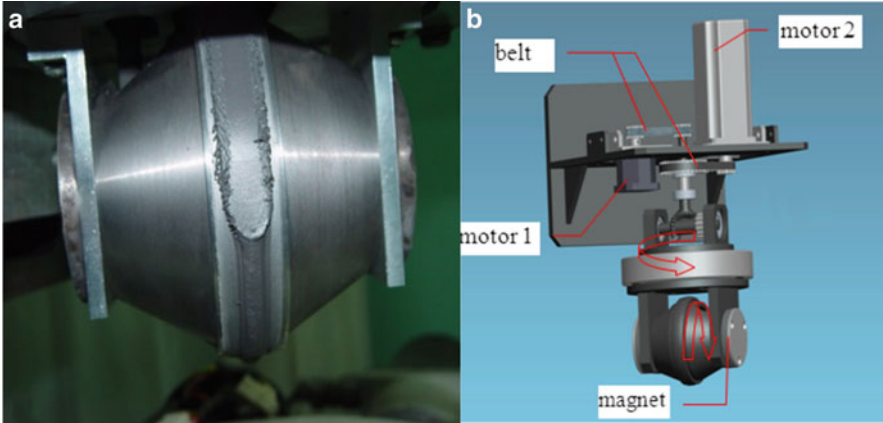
(a) Actual wheel tool with workpiece; (b) main components of the tool design
